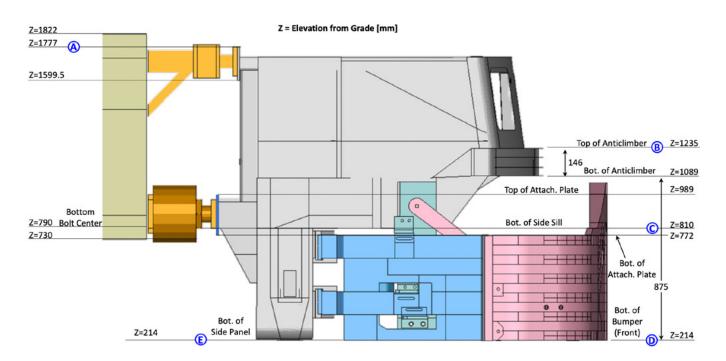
Test Article and Mounting Frame Elevations from Grade [mm]
